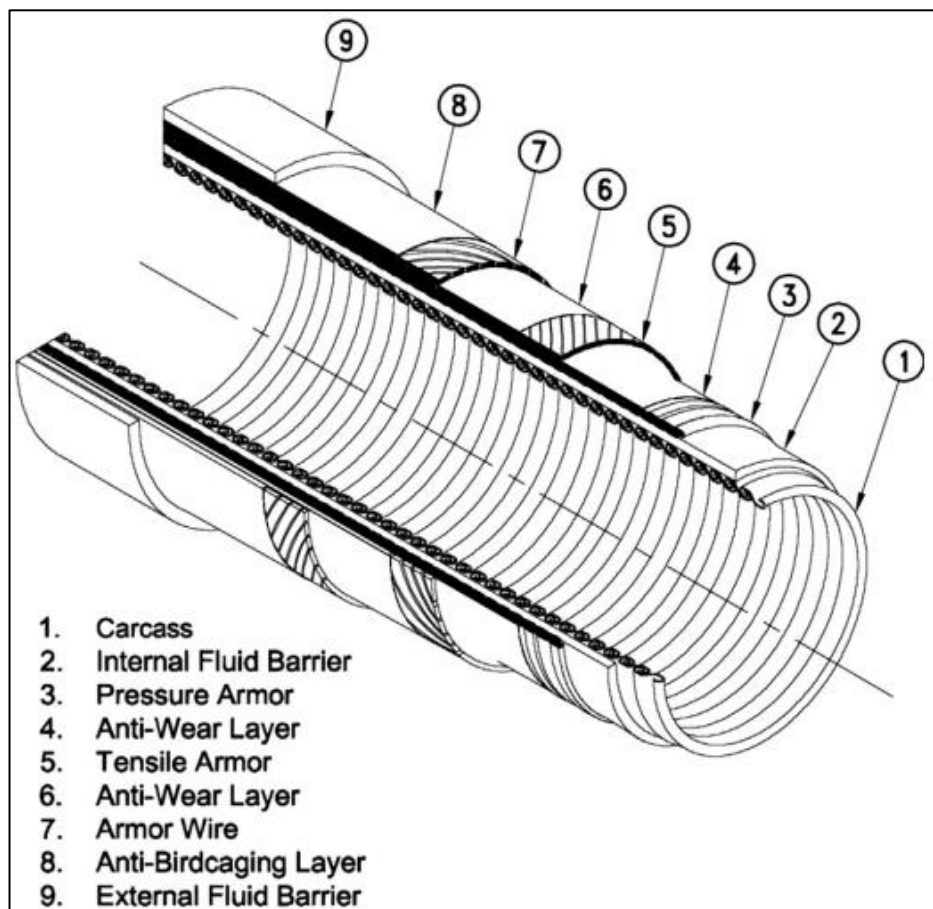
Typical cross-section of flexible pipe (Yong Bai, Qiang Bai, 2014)
